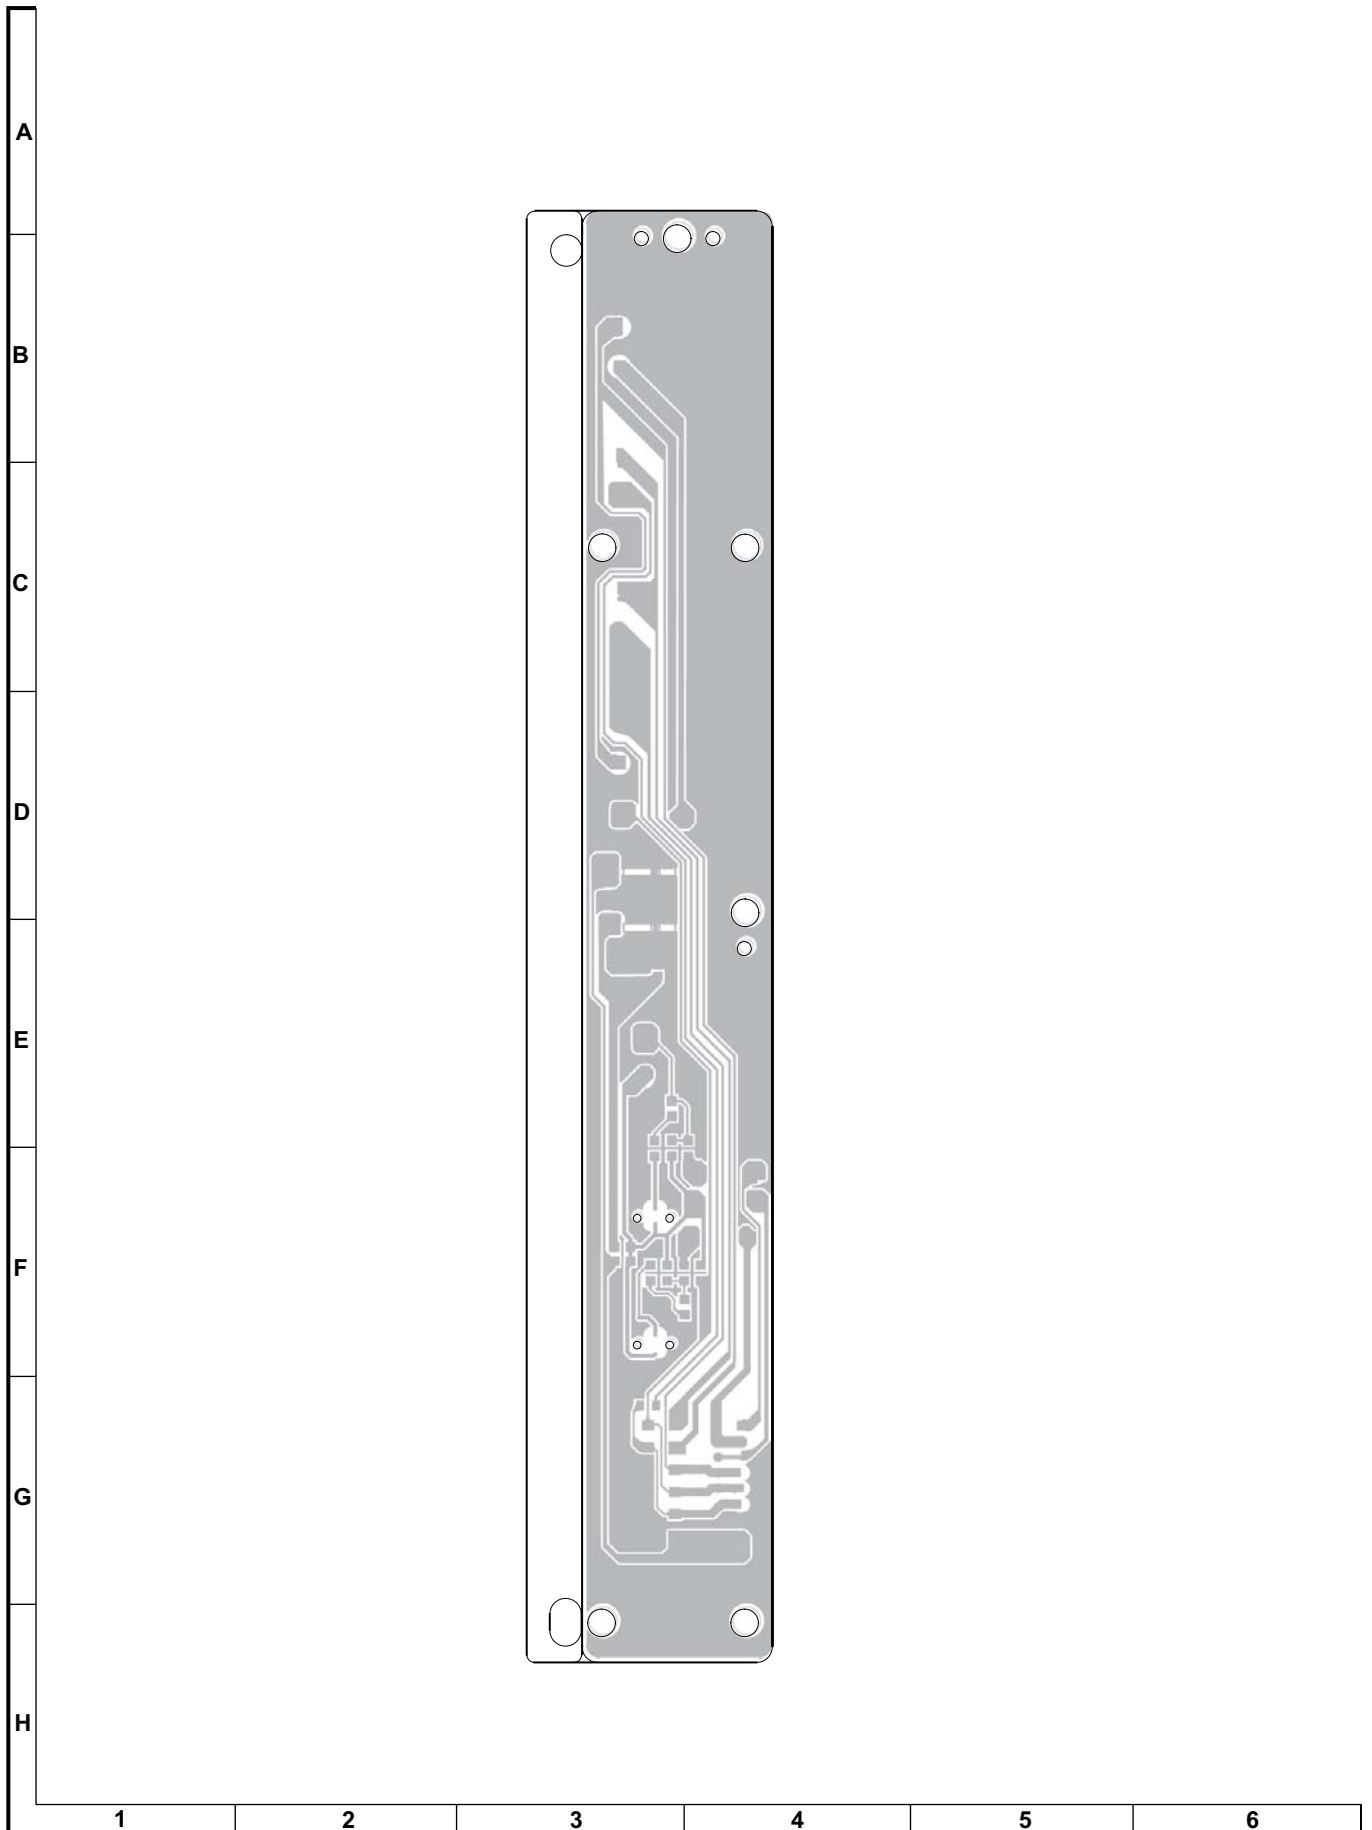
WIRING SIDE OF POWER PCB (BOTTOM VIEW) 2/2
